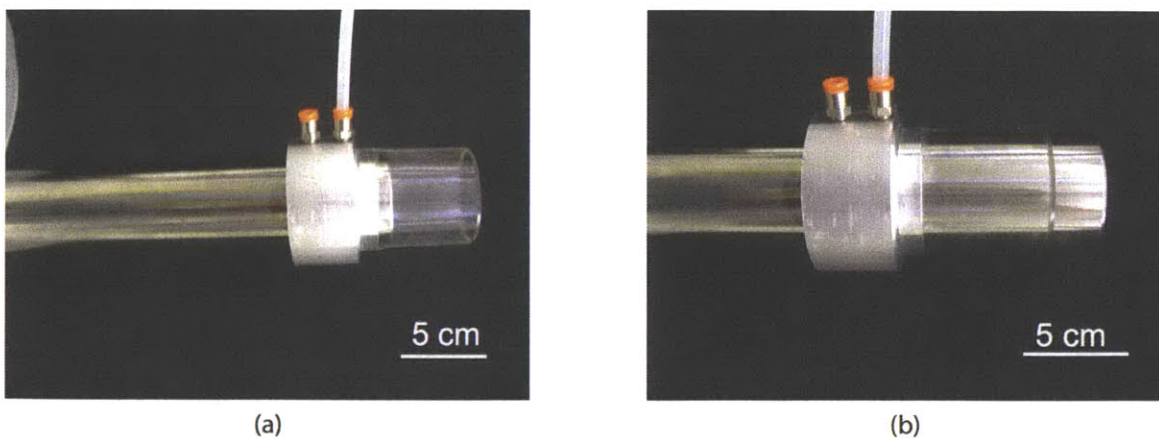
The air bushing designed by Petrzelka to enable mounting of cylindrical stamps on metal rolls [19]. Because of the high surface energy of PDMS, it is too sticky to slide over a metal roll without assistance. This device forms a thin air film cushion between the stamp and the roll, allowing the stamp to be easily slid into place. When the air supply is turned off, the air film collapses and the stamp contracts onto the surface of the roll evenly.
